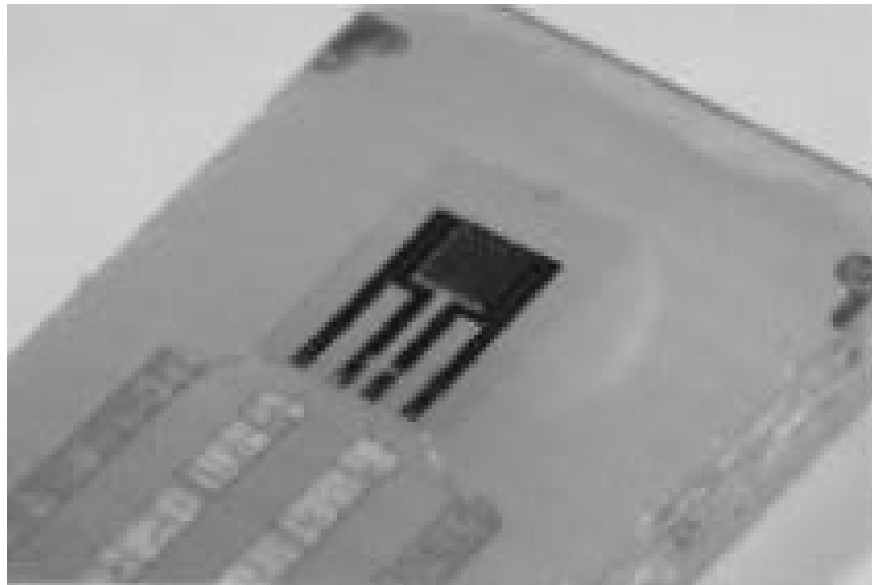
Photograph of a sensor structure after packaging on a printed circuit board
